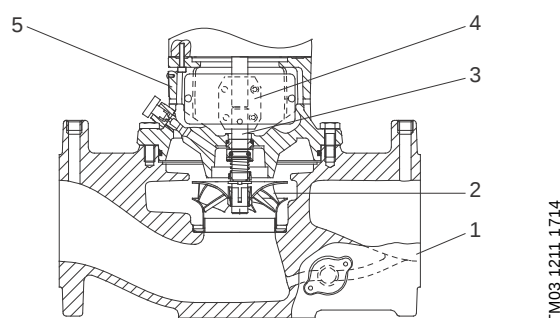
Sectional drawing of TP Series 200 (with flange connection)
